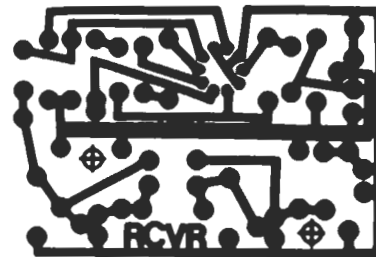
Actual-size etching and drilling guide for receiver at right. Component layout is at left.
